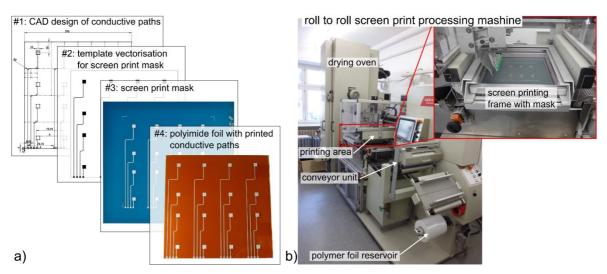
a) Workflow from designing to finished conductive layout of an exemplary TEmSAL, b) roll to roll screen printing processing machine for the automated manufacturing of conductive PI cover foils for TEmSAL
